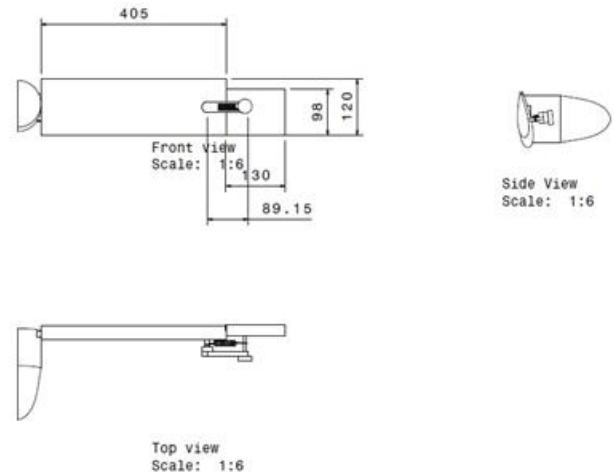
3-View Diagram of a Single Rotor Blade.
